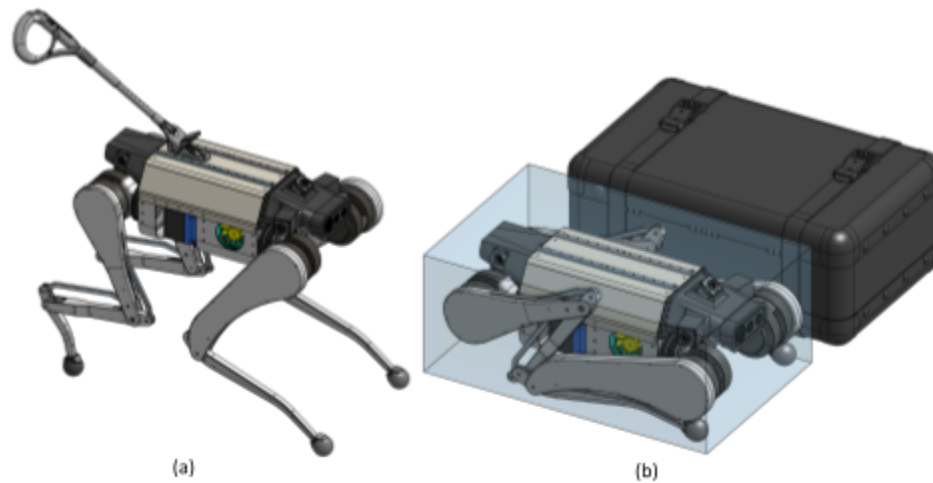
Final design concept. (a) Full robot assembly. (b) Comparison to carry-on suitcase size.
